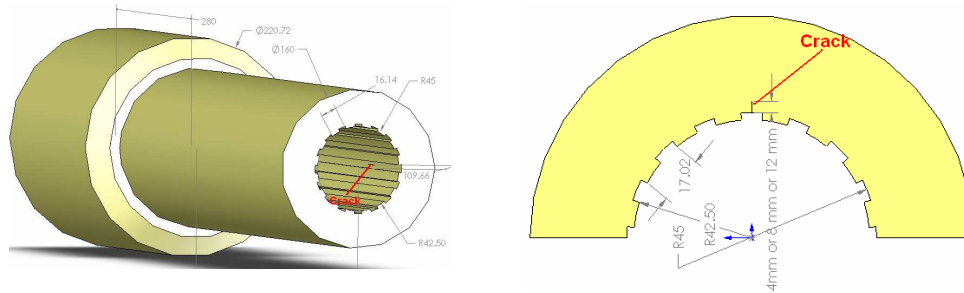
Geometry of the cannon barrel and crack position and dimensions
